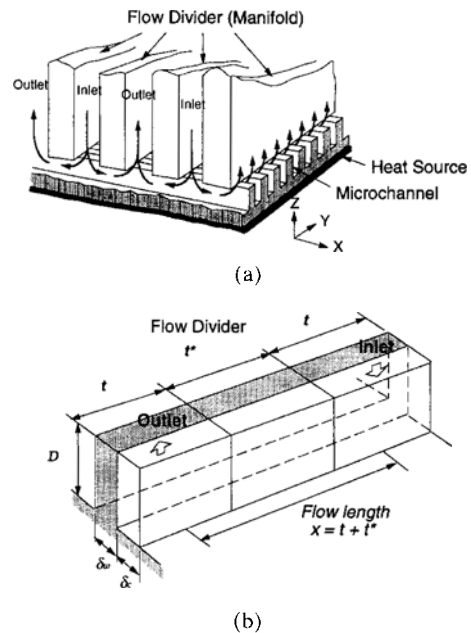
Cutaway view of a manifold microchannel (MMC) heat sink.
